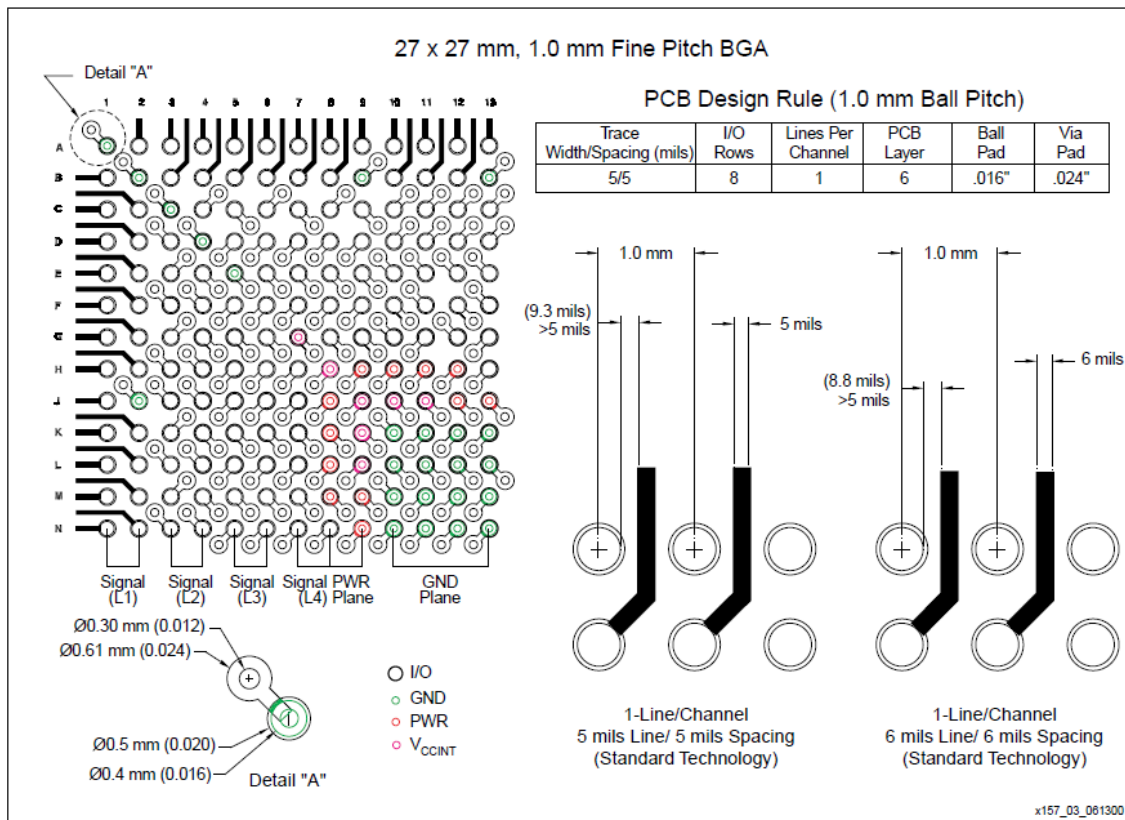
Shows the FG676 PC Board Layout/Land Pattern [38].
